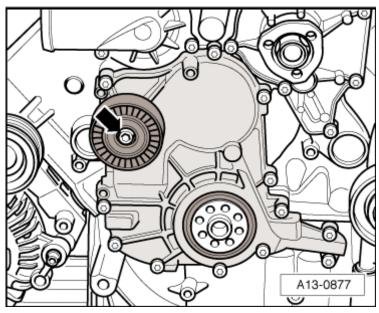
Identifying Bolt -Arrow- And Idler Pulley
